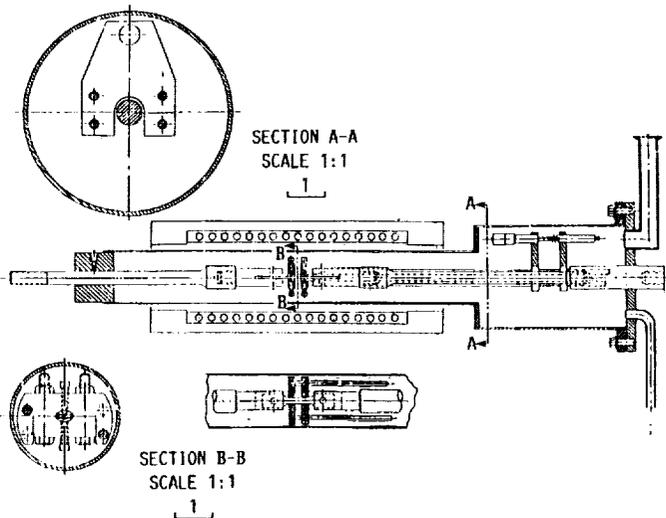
SCHEMATIC DRAWING OF THE HOT VACUUM CHAMBER UTILIZED
